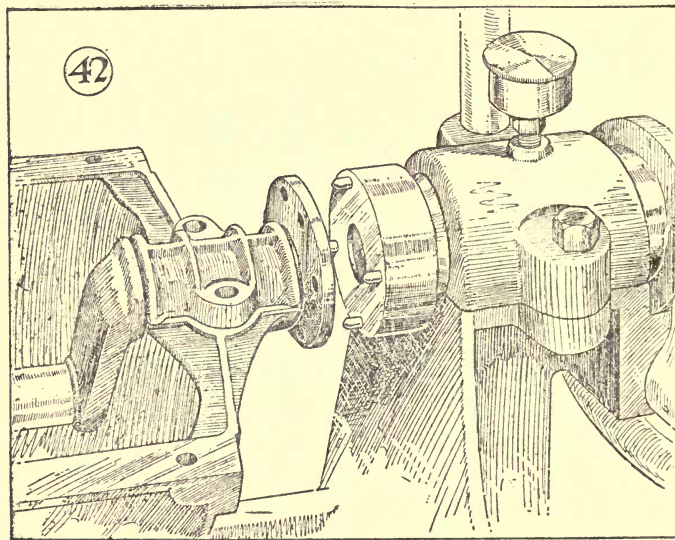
Details of the driving head of the burning-in machine. The lugs engage the holes in the flywheel flange
